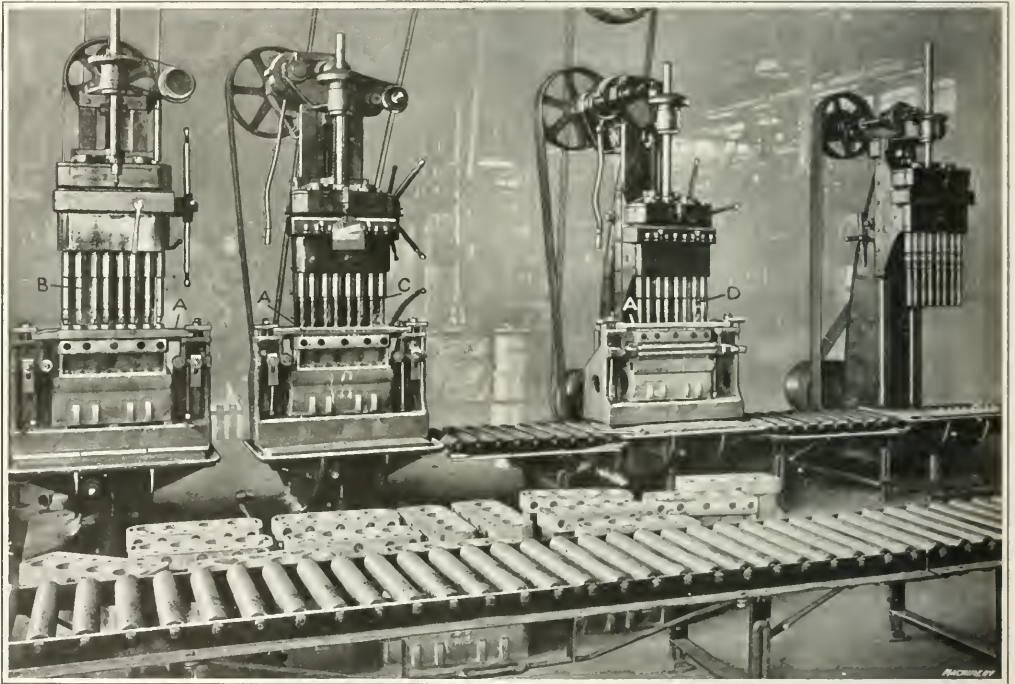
Foote-Burt Eight-spindle Drill Presses equipped with Fixtures having Interchangeable Jig Plates for boring Valve Port Holes, and drilling and reaming Holes for Valve-stem and Push-rod Guide Bushings in Cylinder Blocks—Note Conveyor System provided to facilitate handling Work
